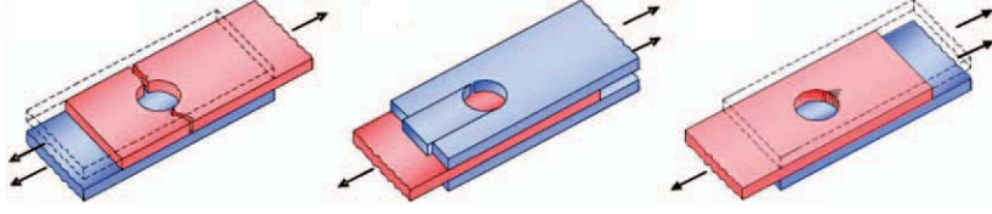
Tensile, shear and bearing failure [2]
